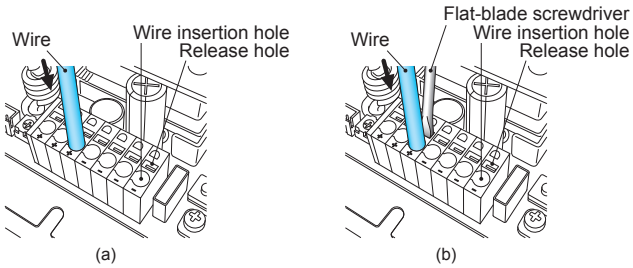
Connecting method of Ferrule terminal and Solid wire
